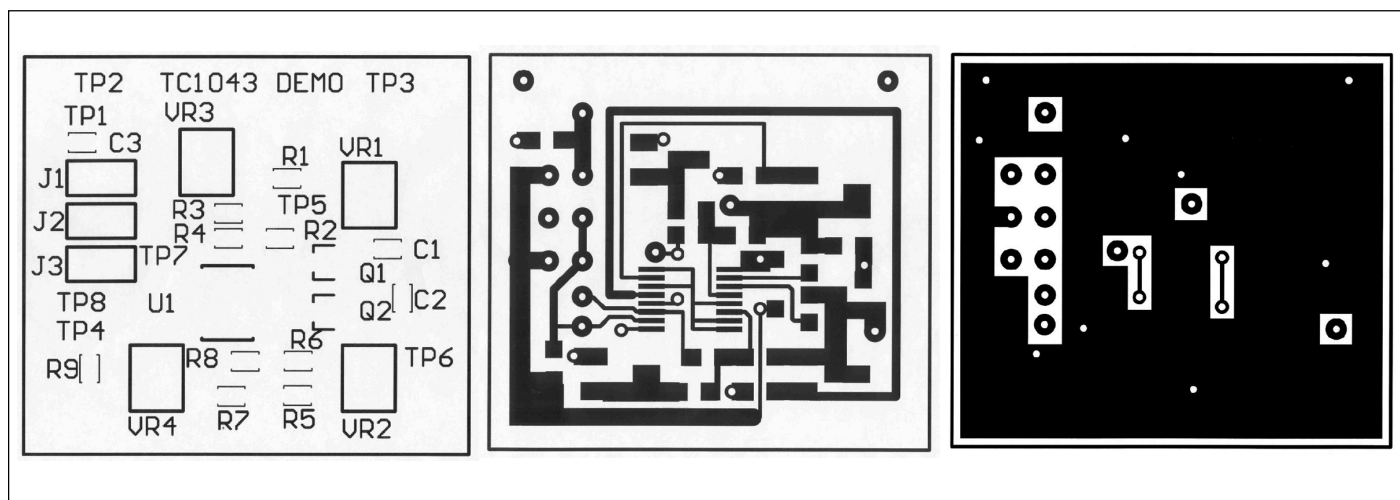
TC1043 Demo Card Assembly Drawing and Artwork
